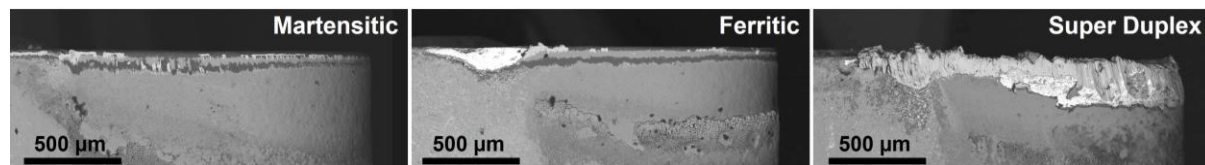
BSE micrographs showing the flank surfaces of the cutting tools GC2220. Obtained at 20kV.
